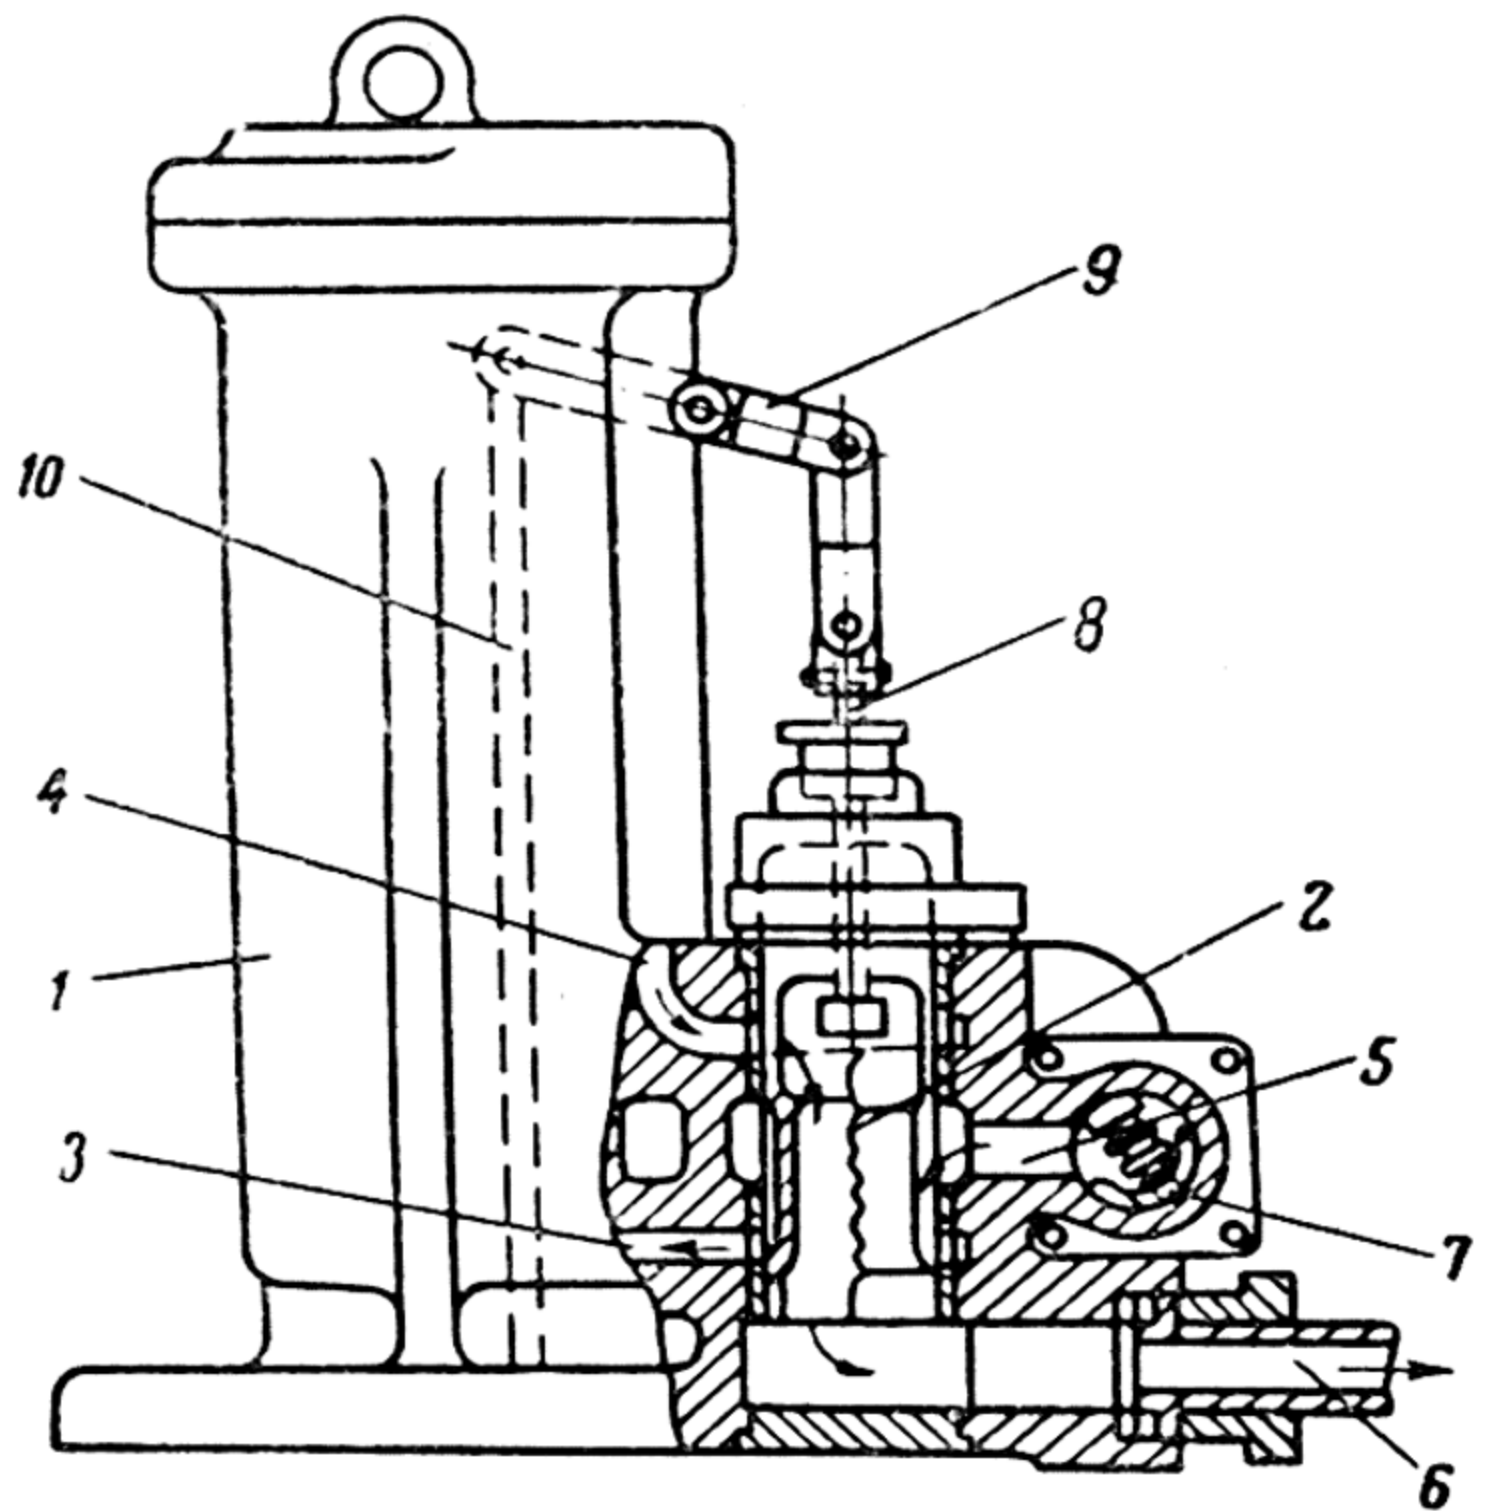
The steam distributing mechanism of the hammer shown in Fig. 152
